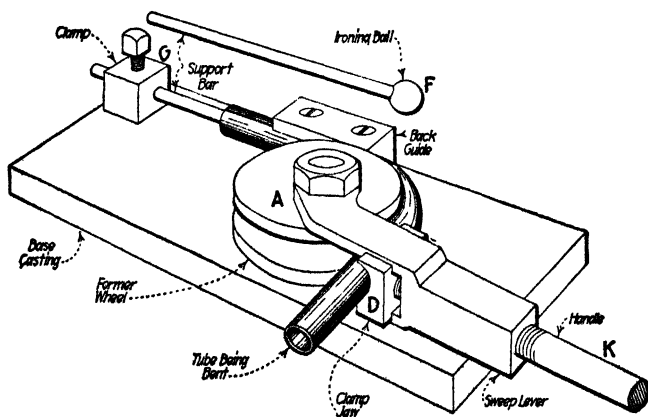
Jig for bending thin tubes. This device is similar in operation to that shown in Fig. 221. Its feature is the ironing ball which is used to prevent buckling when making short radius bends. (*P. C. Mason. American Machinist*, Dec. 9, 1915, p. 1040.)
